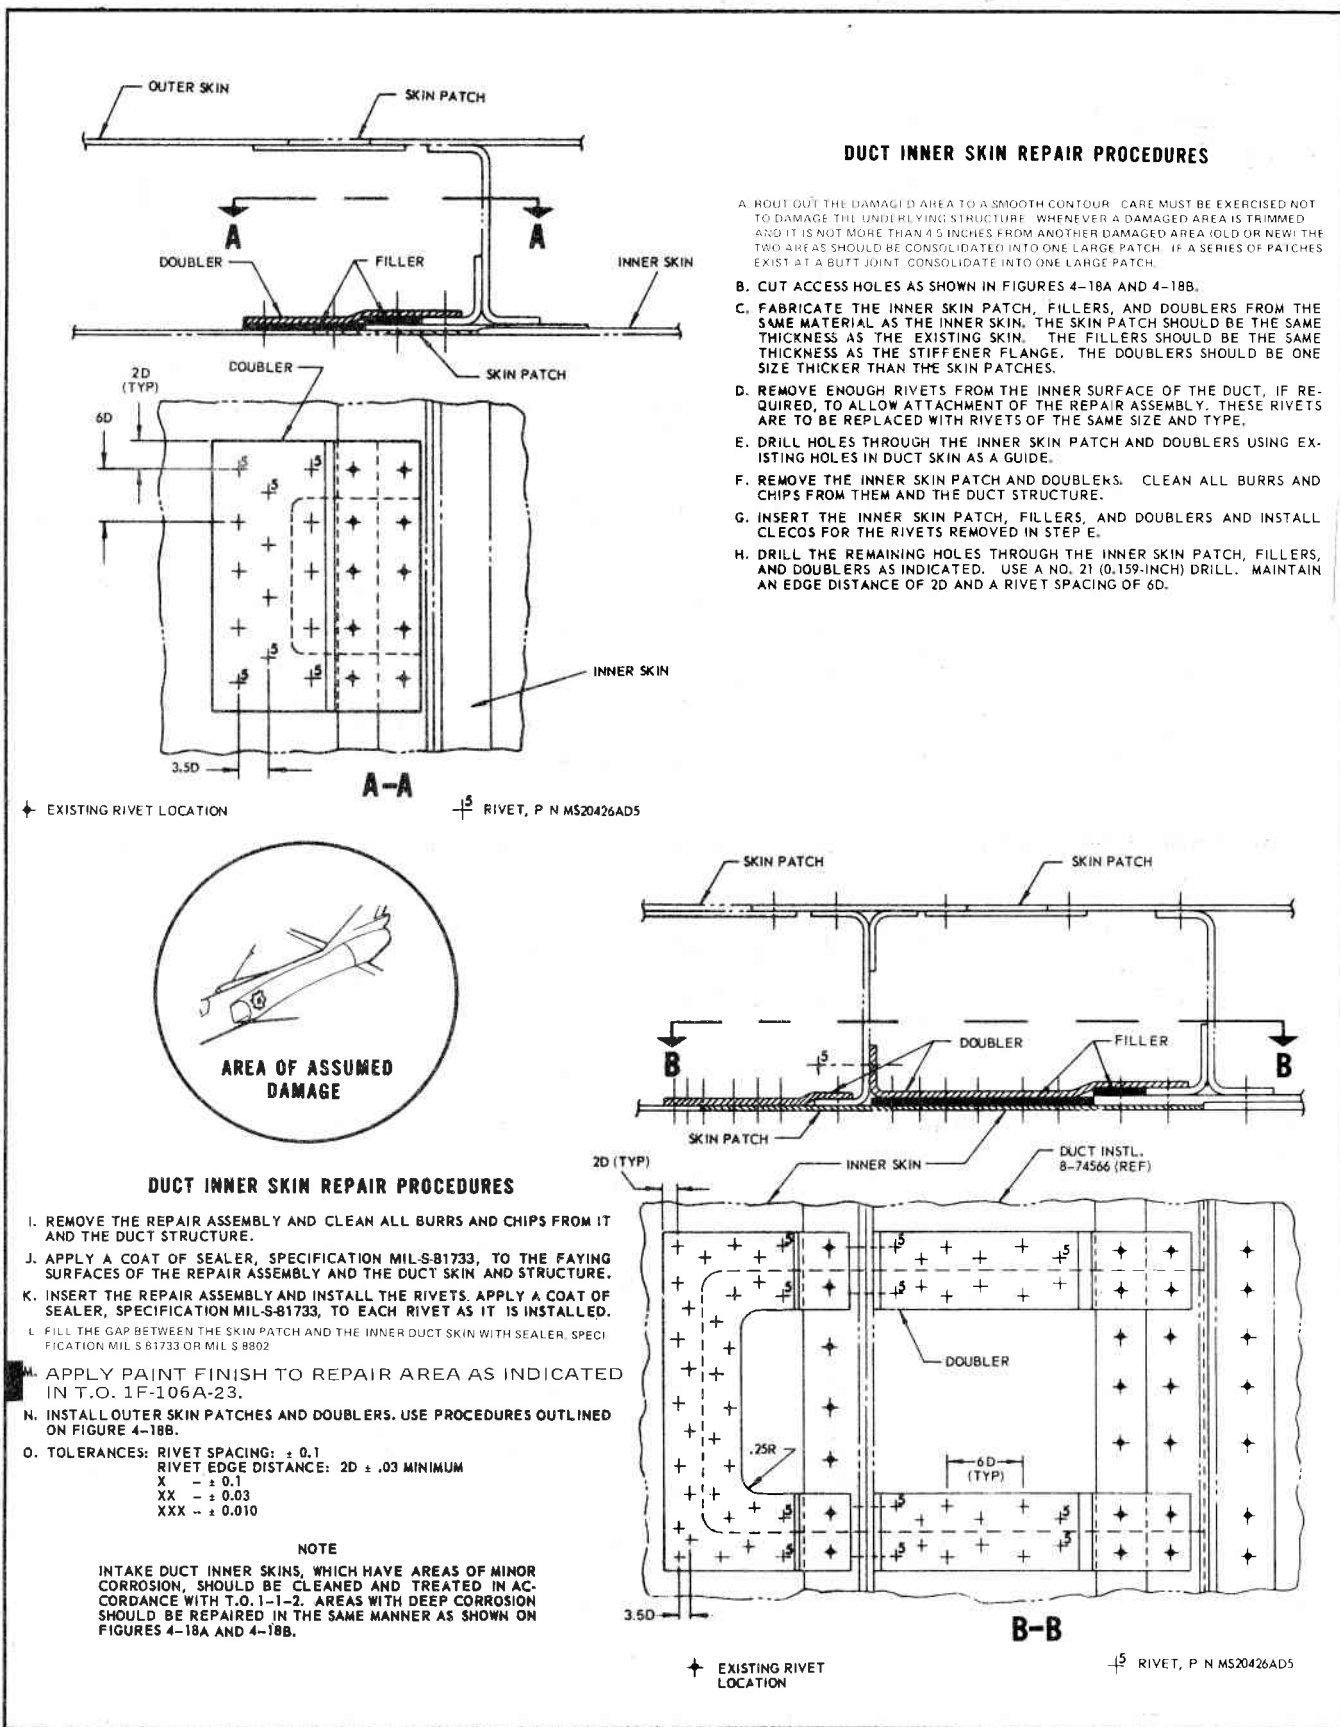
A. Intake Duct Inner Skin Typical Repair (Sheet 1 of 2)
